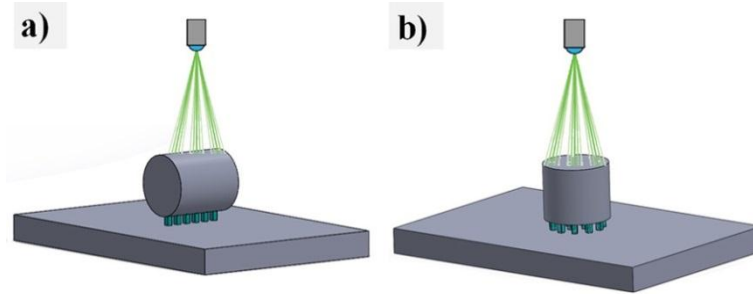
Specimens building strategy: a) horizontal and b) vertical.
